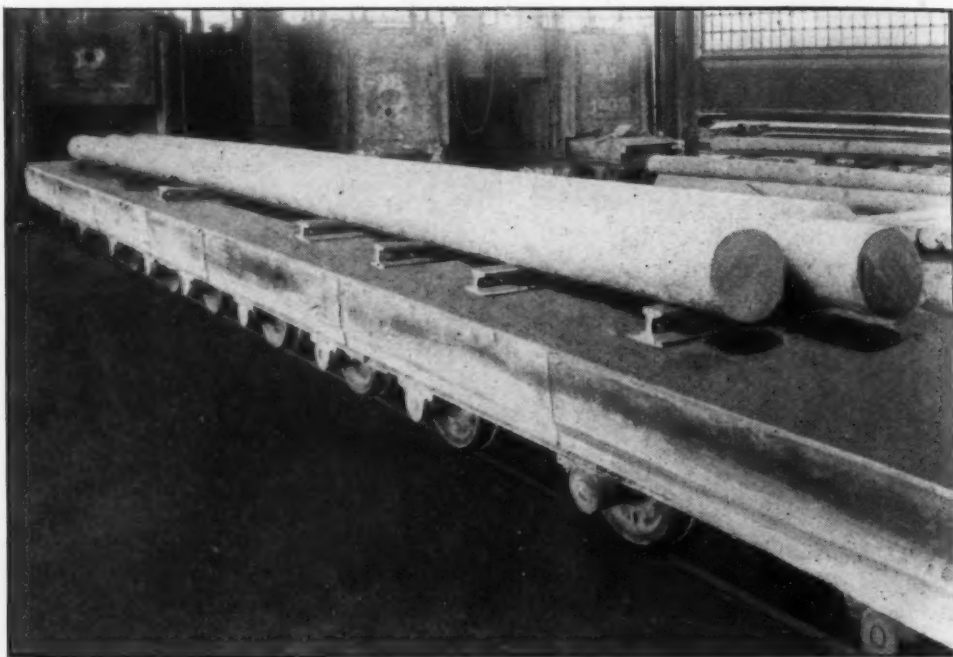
Annealing Furnace 40 Feet Long and 54 Inches Wide, Equipped with 11 Oil Burners.
